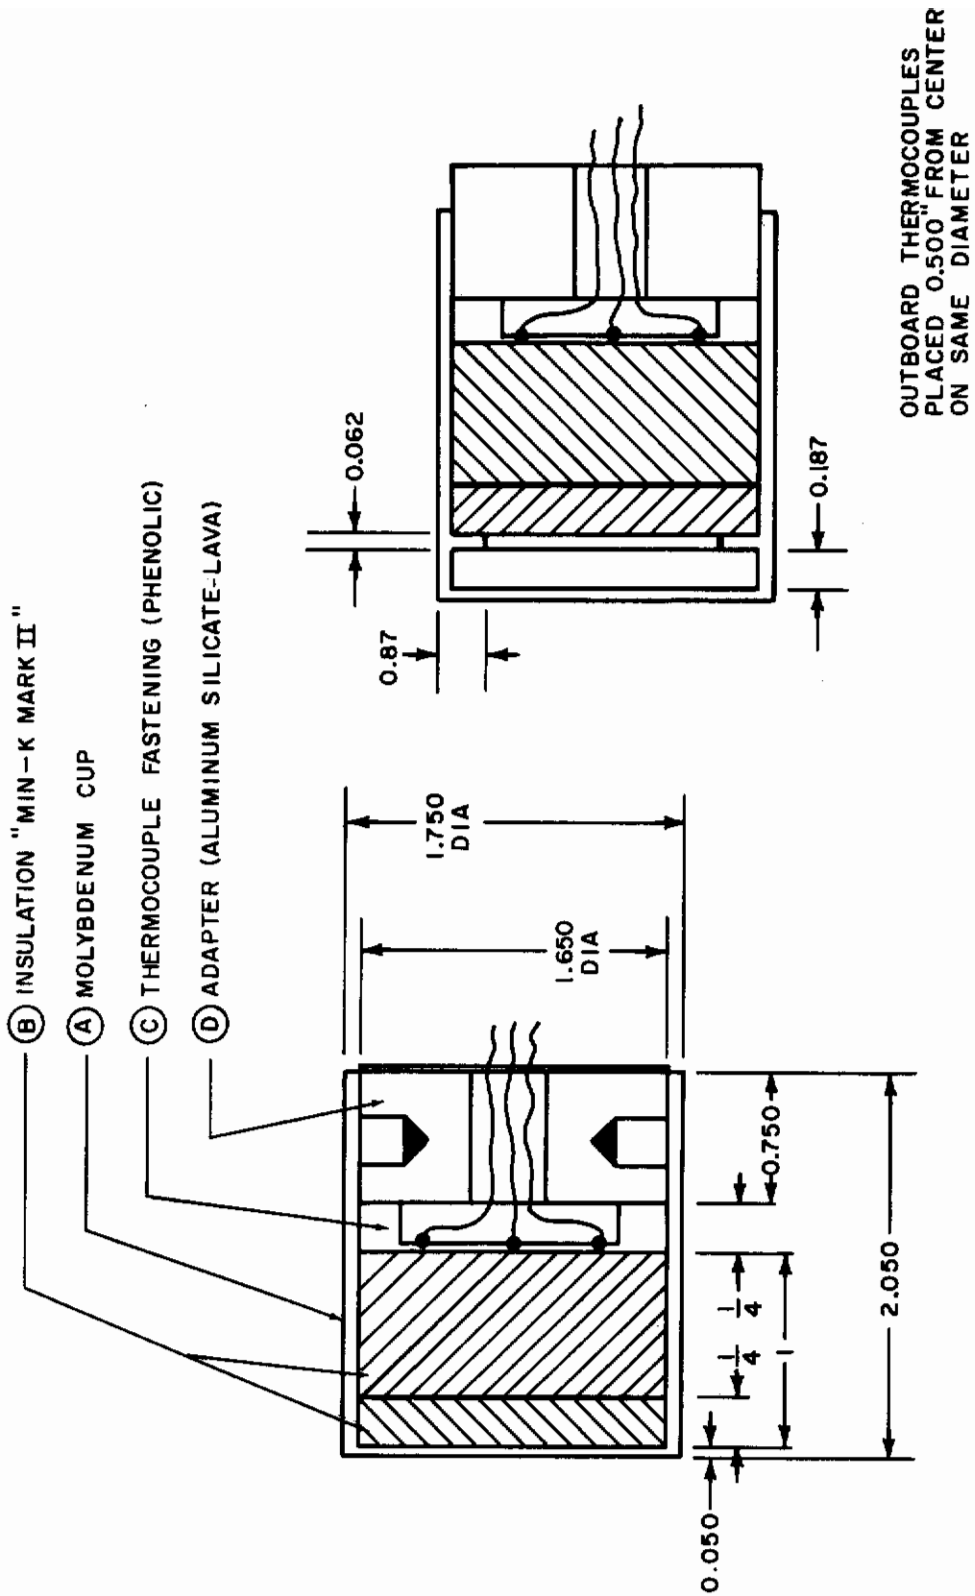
MOLYBDENUM RADIATION SHIELD MODEL ASSEMBLY
